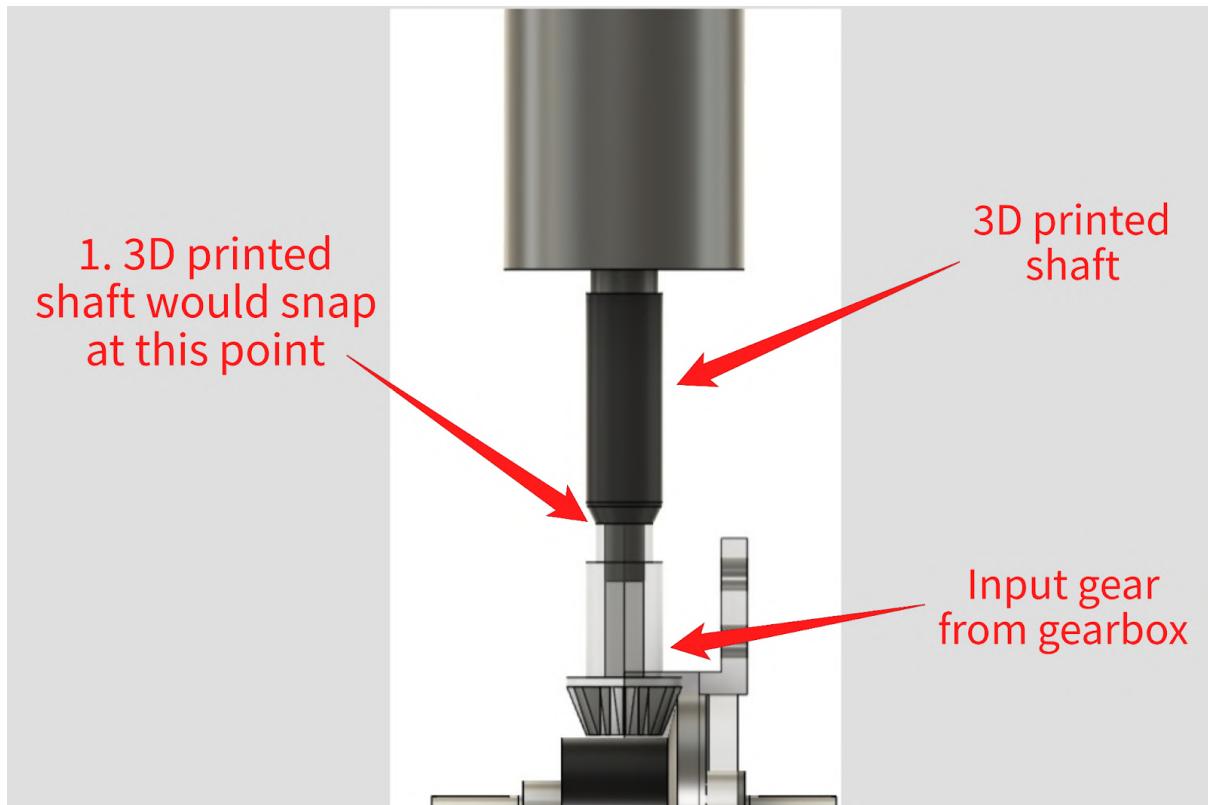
Showcase of the typical failure point of the 3D printed drive shaft when made from PLA
